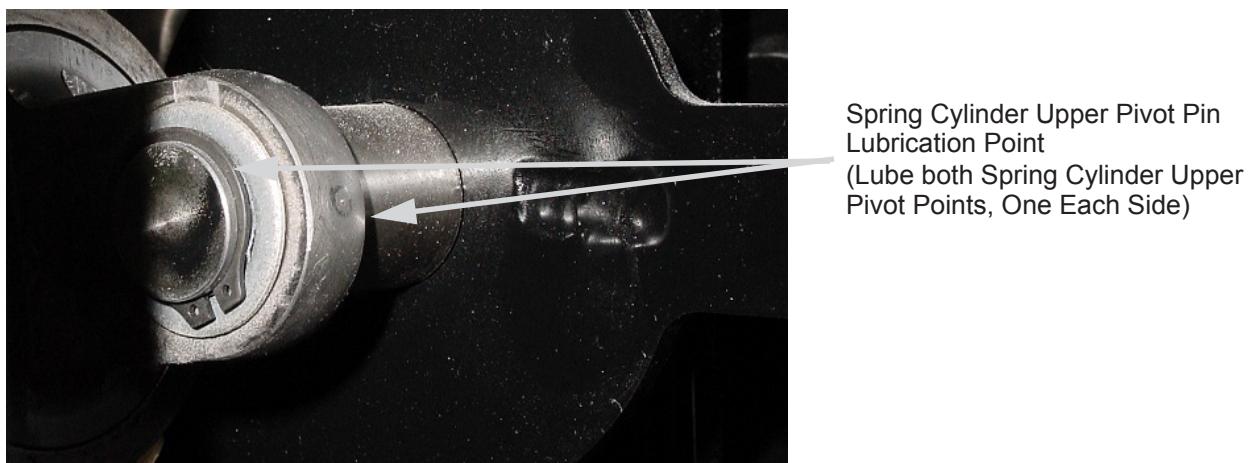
Spring Cylinder Upper Pivot Pin Lubrication
